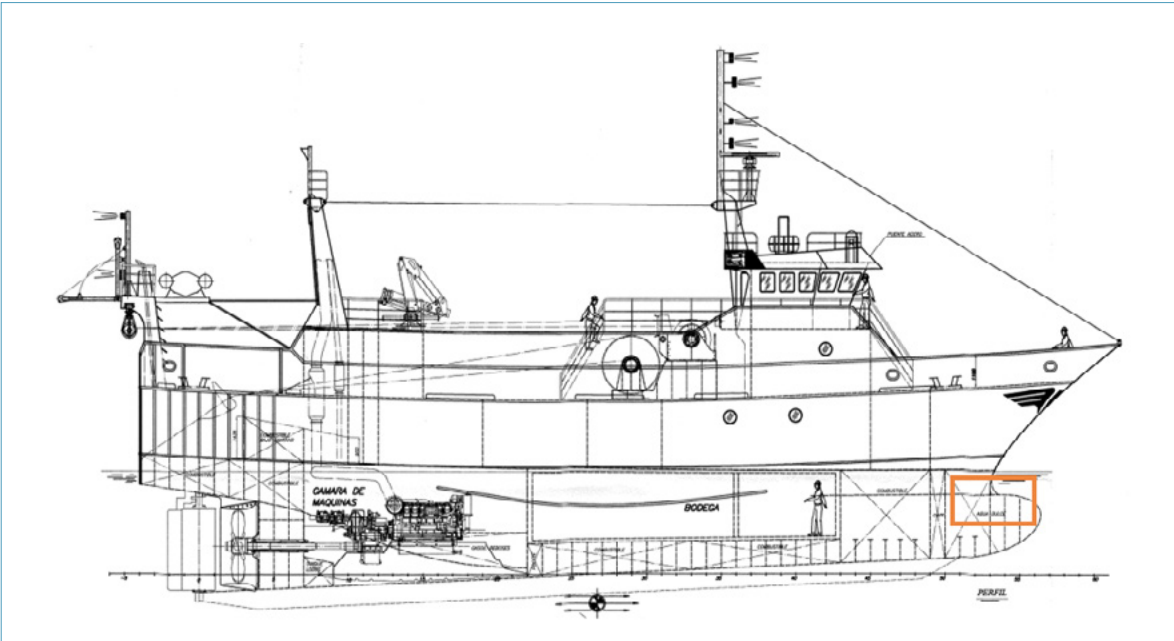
Ship plan under Spanish flag - side elevation (2007). (Source: Astilleros Armon VIGO S.A)
